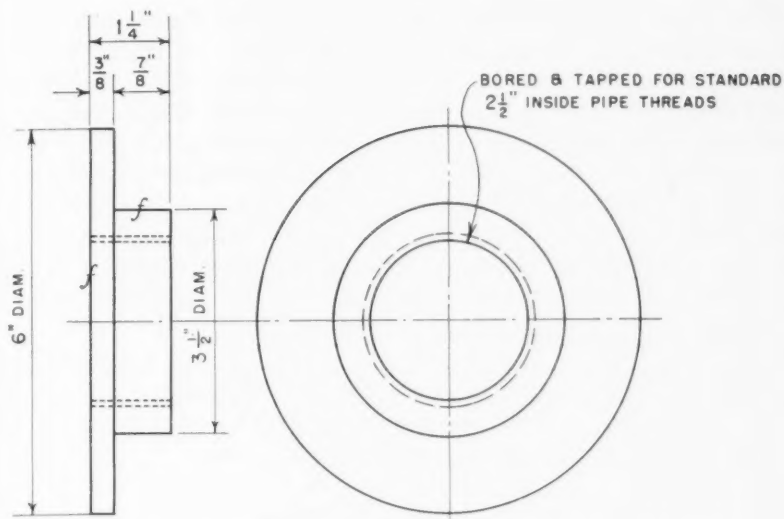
Detail of Nozzle Connection Piece; material—mild steel
